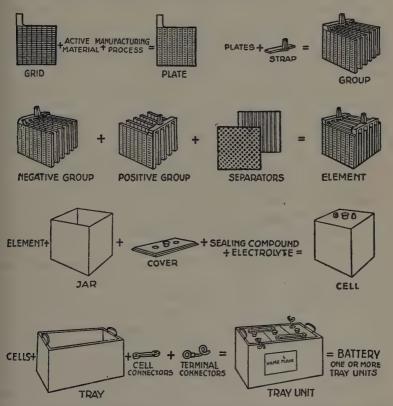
Parts and assembly of a typical portable storage battery. (Lead-sulphuric-acid type.) Sections of lead cell.
